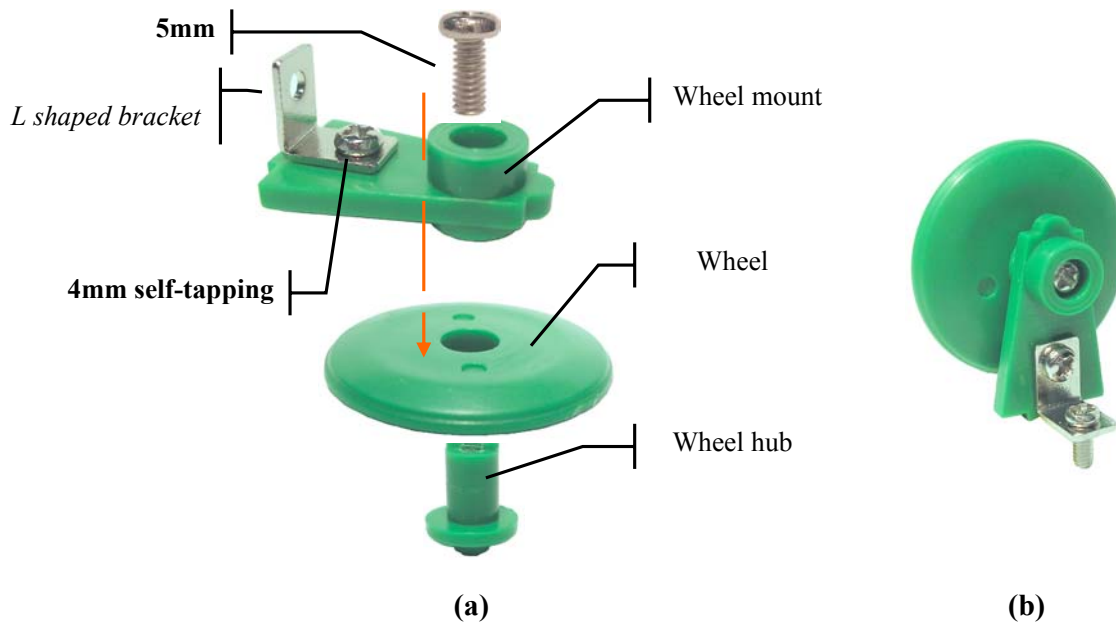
(a) and (b): The small wheel construction and the completed wheel.
